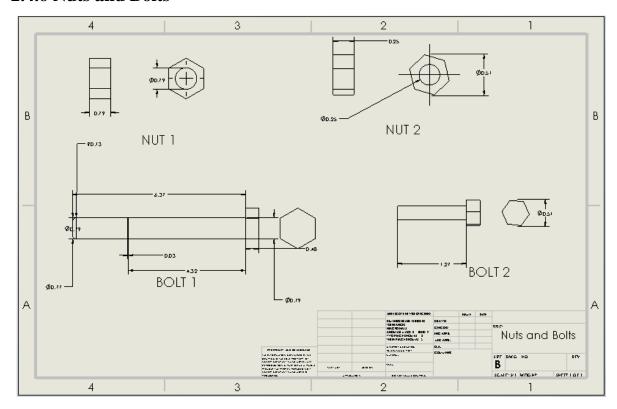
2-Dimensional Sketch of Nuts and Bolts
